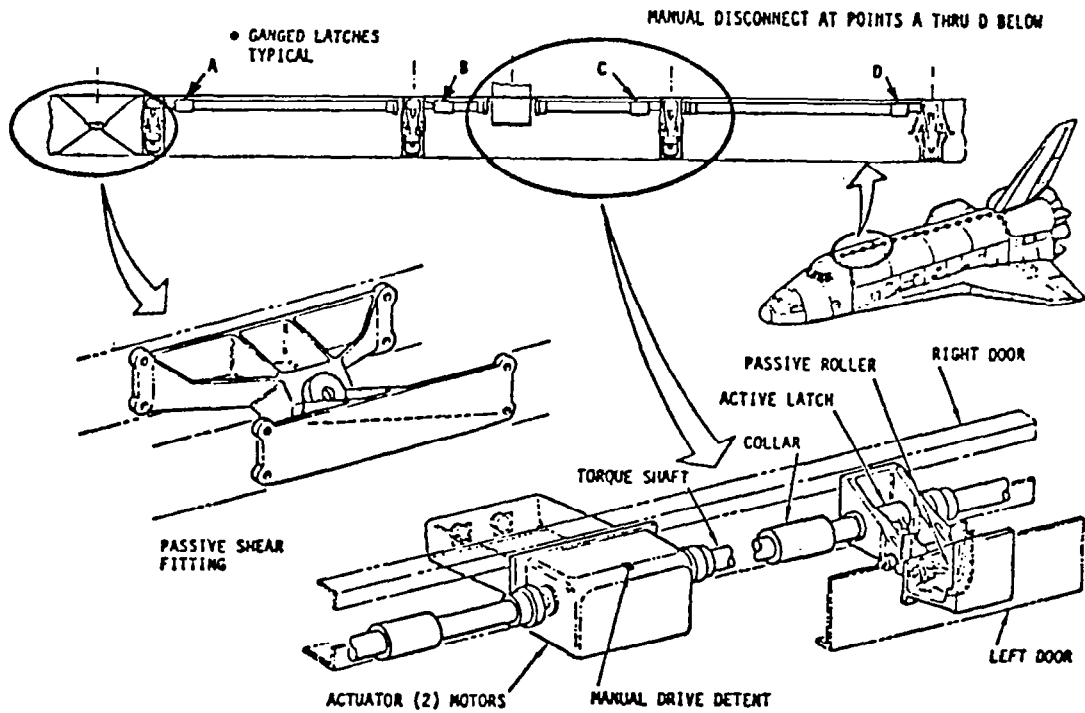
PAYLOAD BAY DOOR CENTERLINE LATCH SYSTEM
